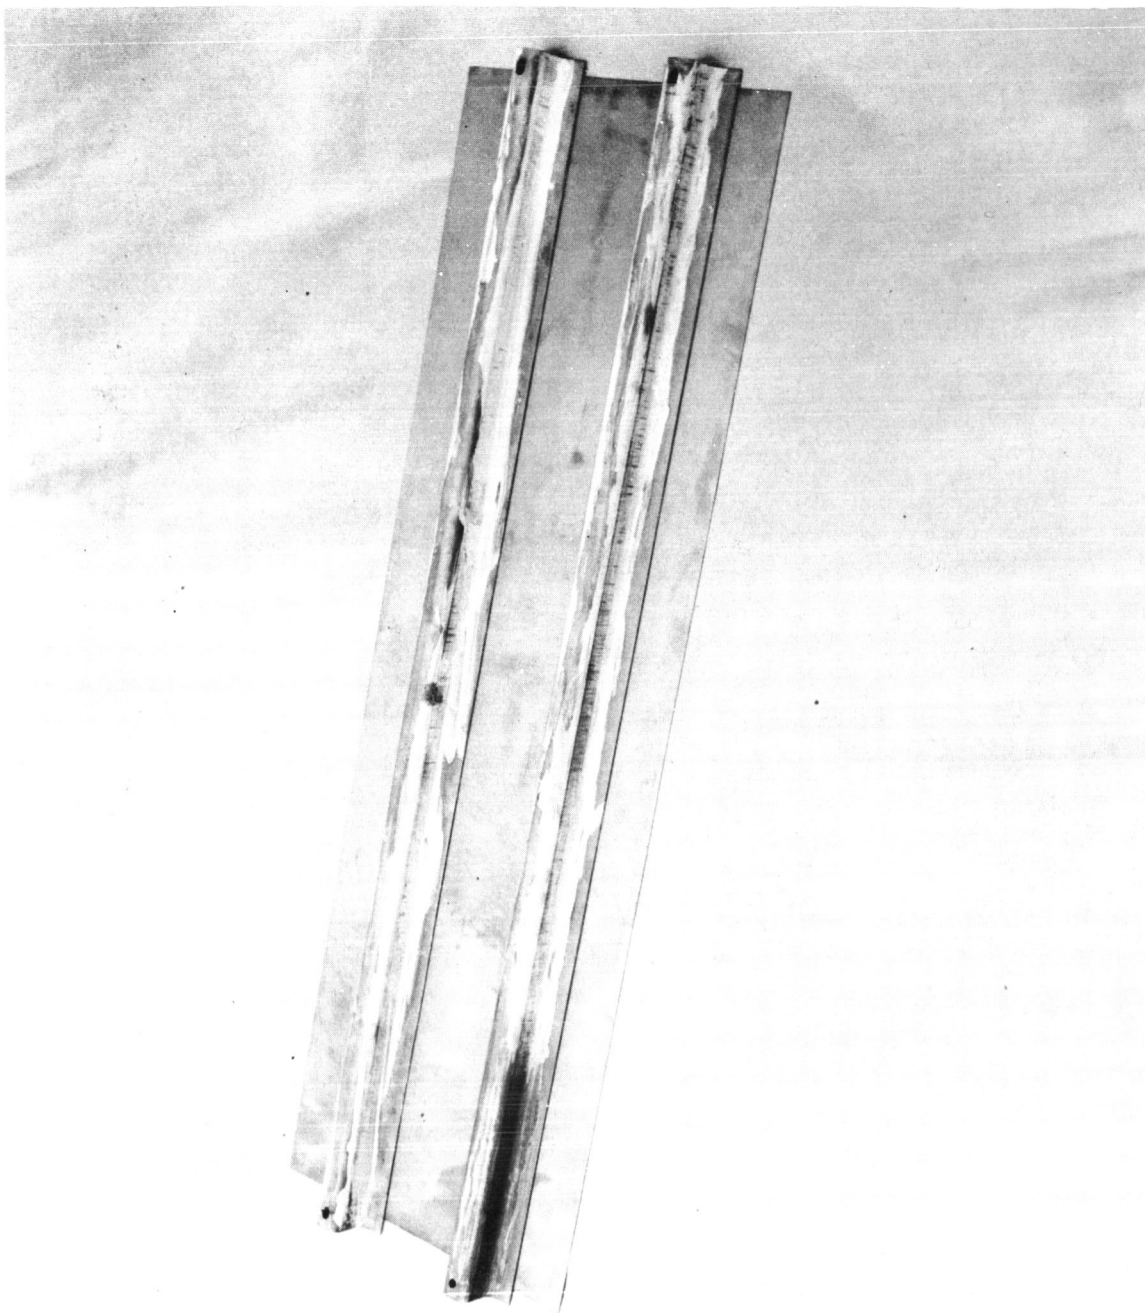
FORMED "HAT" SECTION WITH BORON
